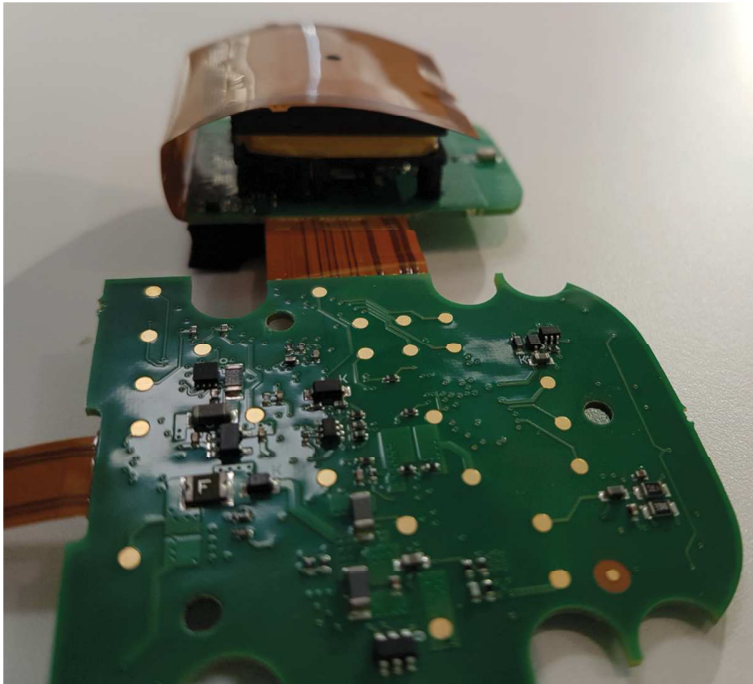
Front view of Radio Module and flexible PCB with radio coil
